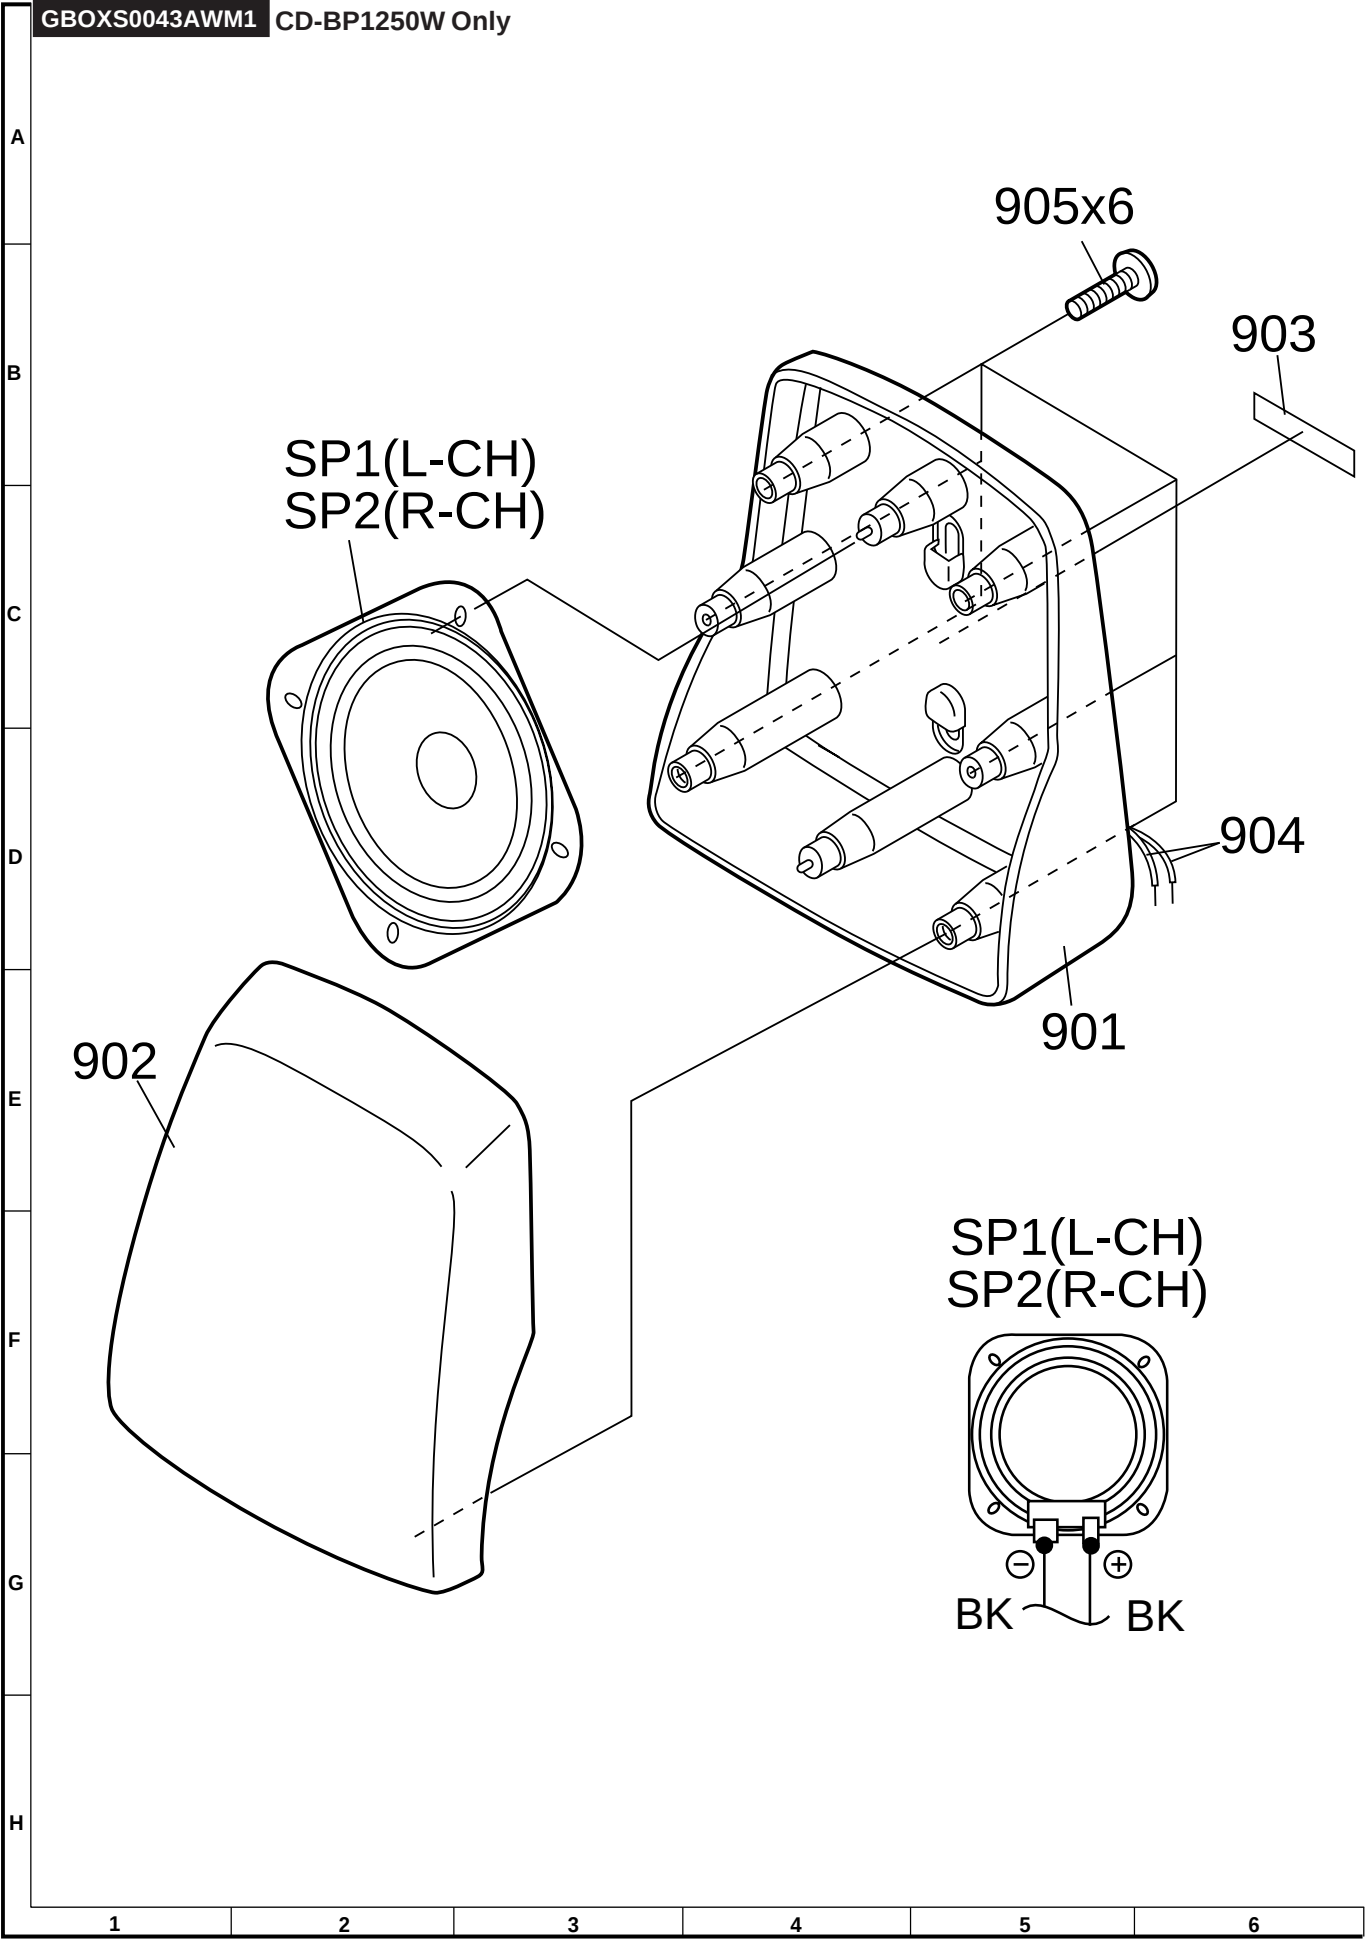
SPEAKER EXPLODED VIEW (2/2)
